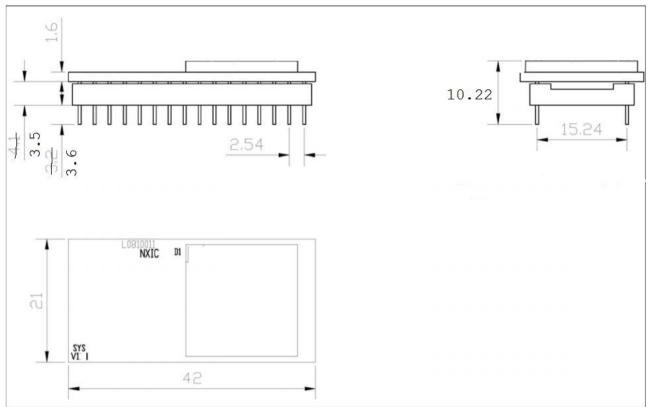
Dimensioned Device Drawing NIC 52-RE (top side)
